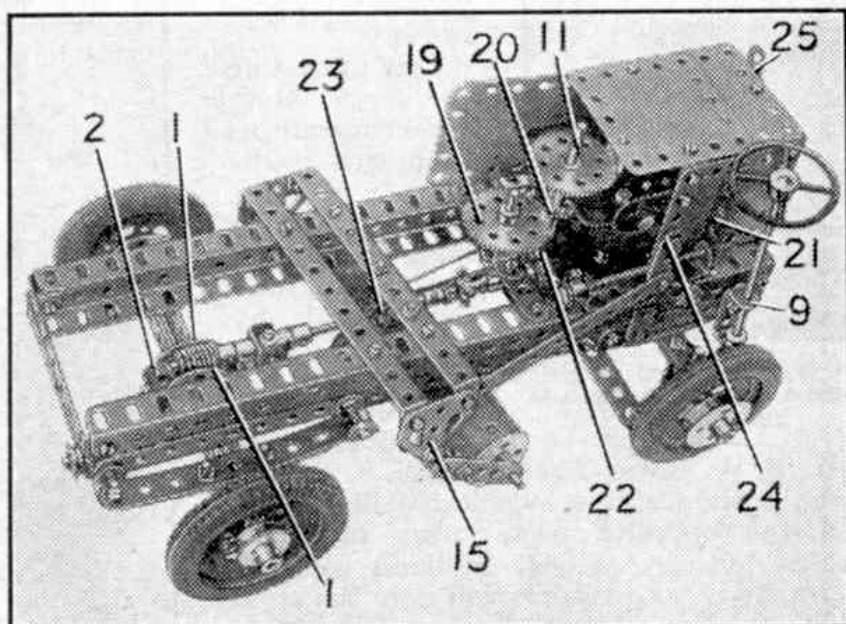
The Road Sweeper with cab and tank removed to show the gearing and the method of mounting the brushes.
